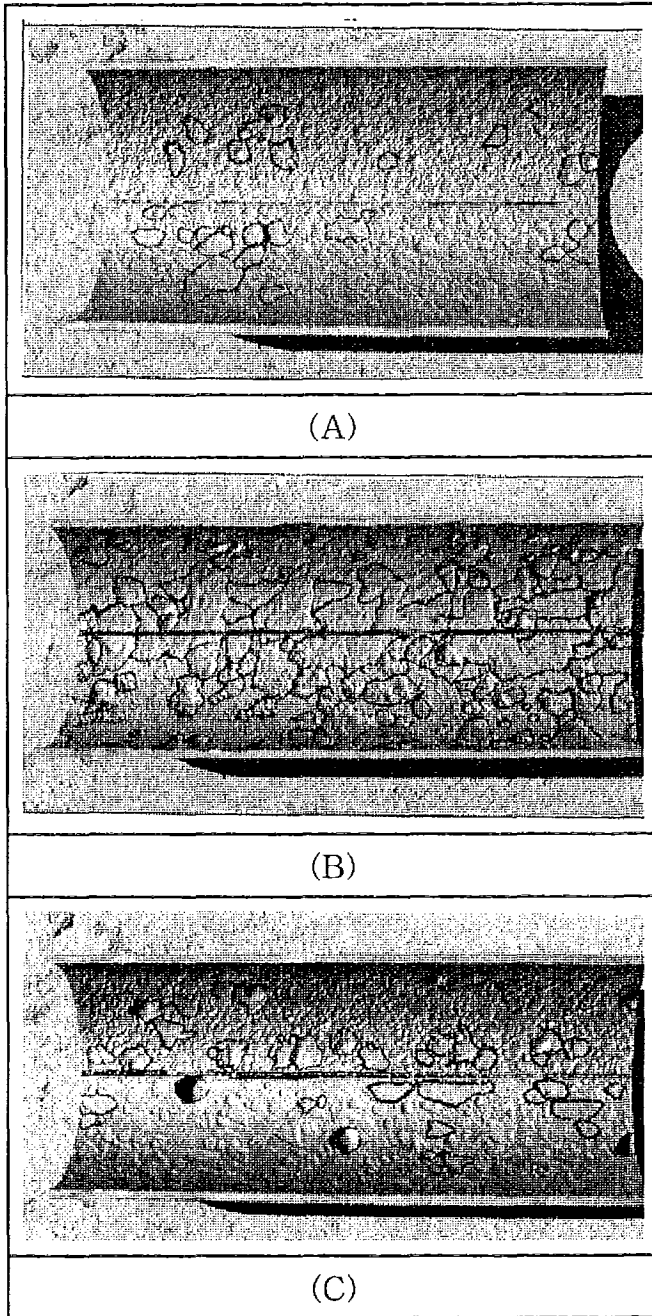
Photographic view of internal side of corroded ERW carbon steel pipe;
